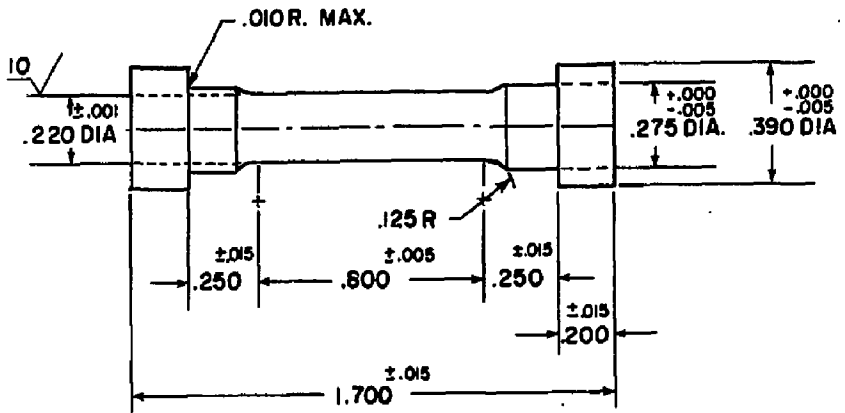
Buttonhead tensile specimen. Dimensions are in inches.
